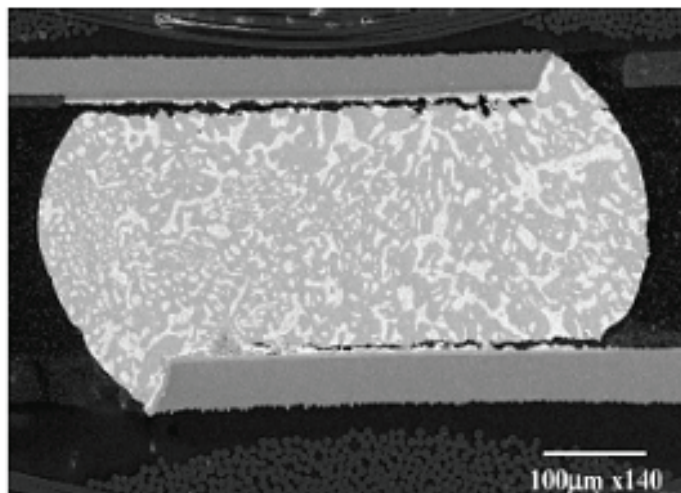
Cracked solder ball on the verge of fracturing (from Lall)
